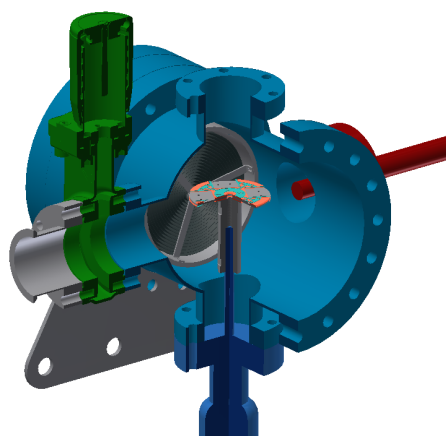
Section view of the inside of the transport chamber consisting of: Transfer rod (red), valve (green), sample stage in the center and NEG pump at the backside.
